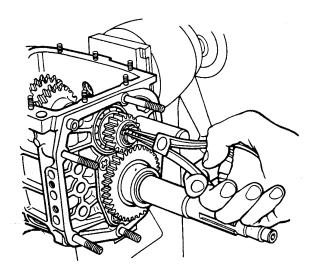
Removing Reverse Gear Lockring from Countershaft
